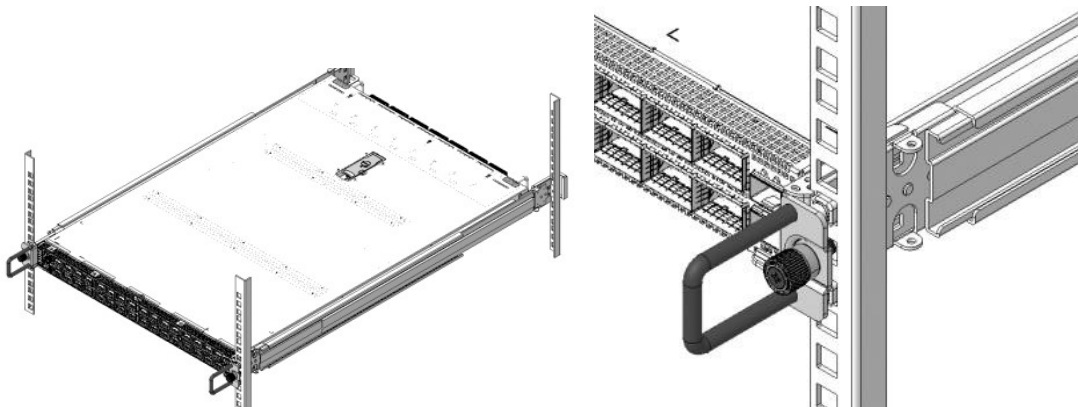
Pushing Inner Rails into Outer Rails and Fastening Thumbscrews
